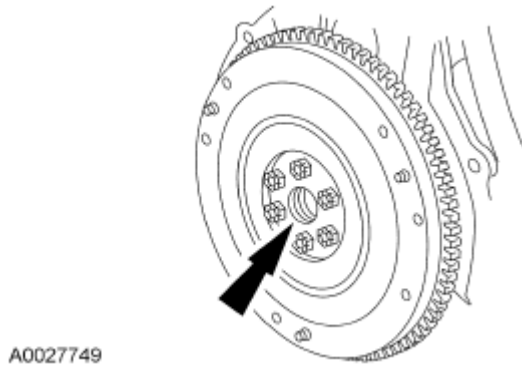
Locating Transaxle Input Shaft Pilot Bearing
